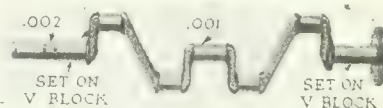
The alignment of the bearings may be checked by the crankshaft, which should be first straightened to a limit shown above
